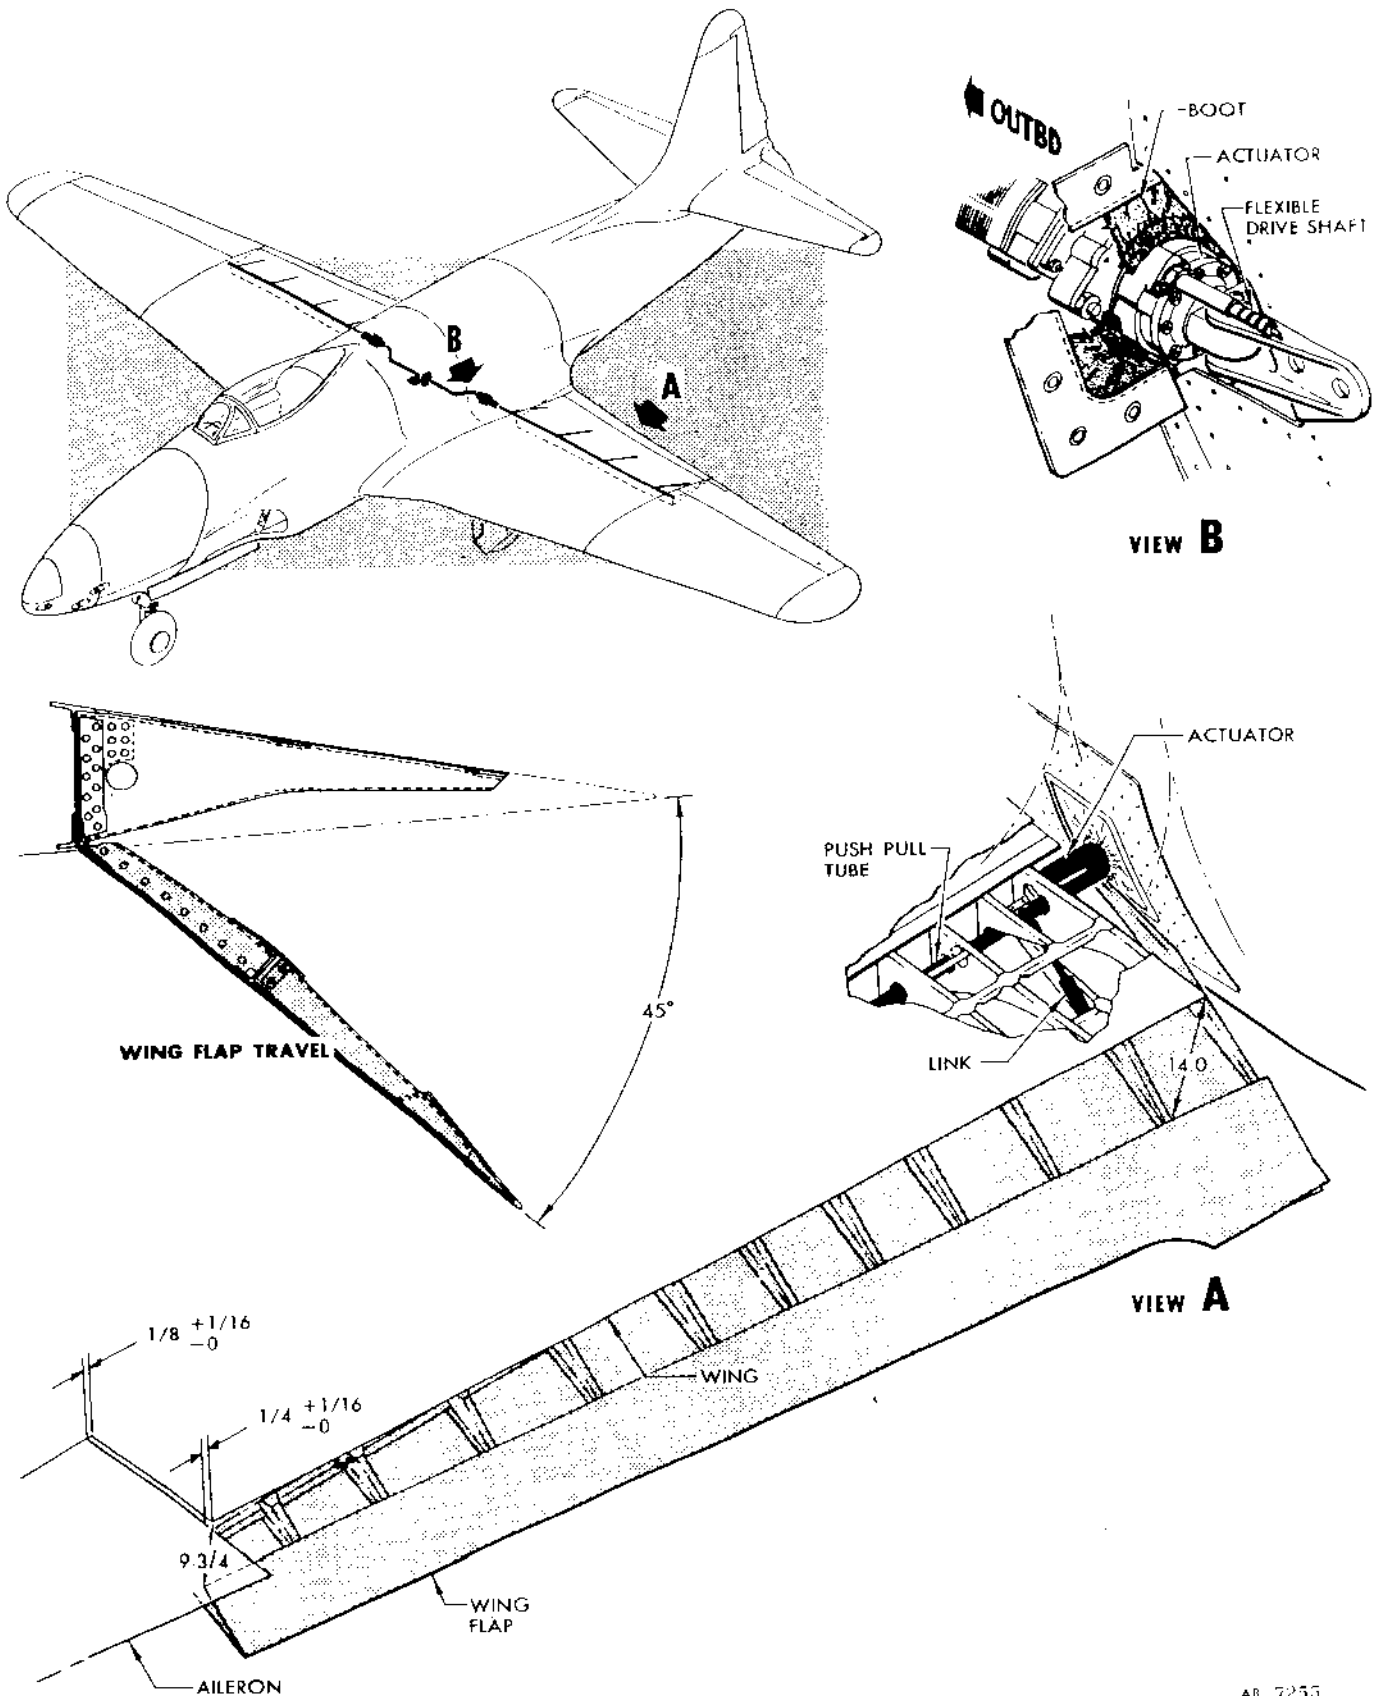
(Sheet 1 of 3 Sheets) — Wing Flap Installation
